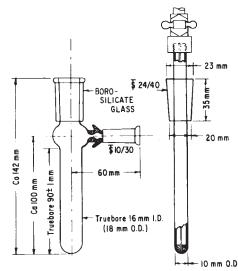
Detailed Dimensions of the Glass Cell and the Inner (High-Voltage) Electrode
